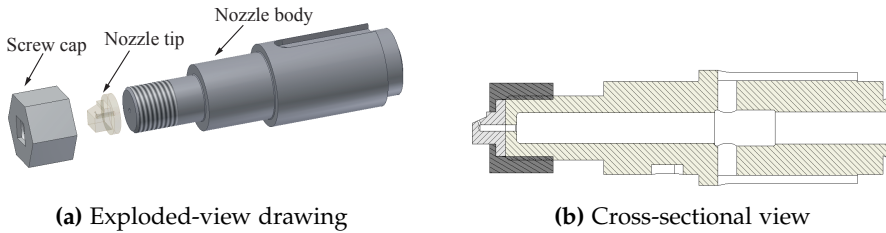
The transparent spray nozzle consists of three parts: a transparent nozzle tip machined in PMMA material, a screw cap, and nozzle body machined in steel. Figure 6.4 shows the internal dimensions of the transparent nozzle tip.
